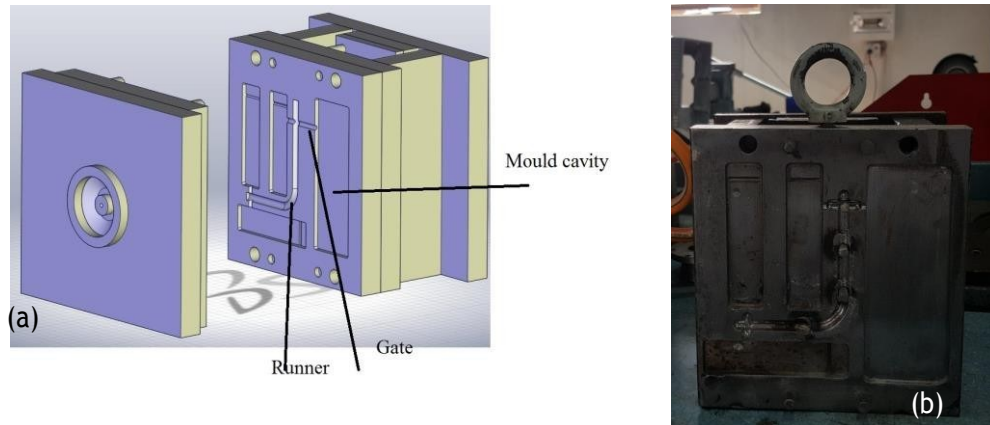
(a) Mould Assembly Model (b) Mould cavity and runner
